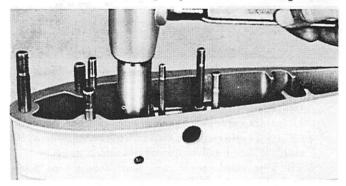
Removing Drive Shaft Needle Bearing From Gear Housing
